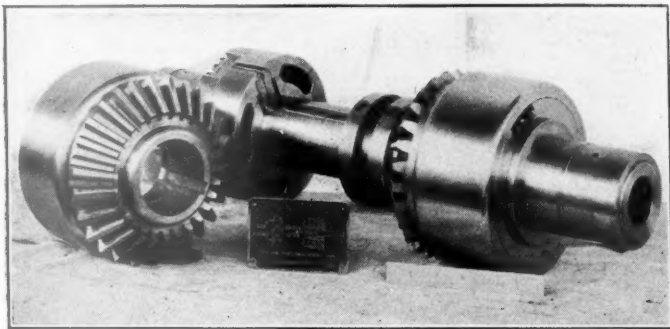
Driving and Reversing Clutches, Showing Large Friction Rings and Toggle Arrangement for Expansion
